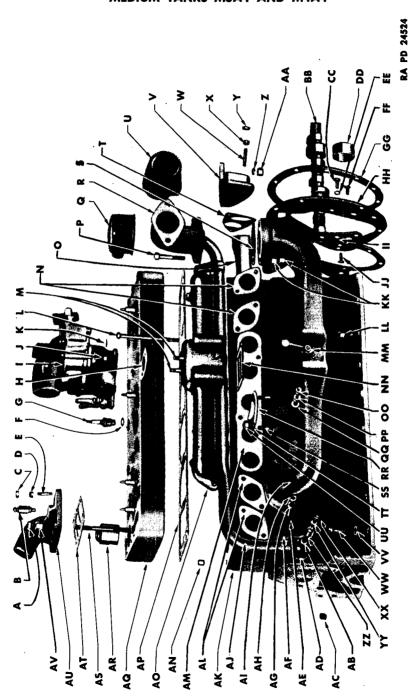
No. 1 Engine (Single Water Pump Type), Partially Exploded
